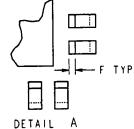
Typical Recommended PCB Dimensions vs. Stencil Aperture for Dual In-line Packages with DAP < 2 mm.
